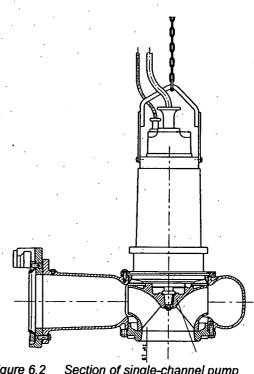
Section of single-channel pump showing impeller clearance at suction opening.
